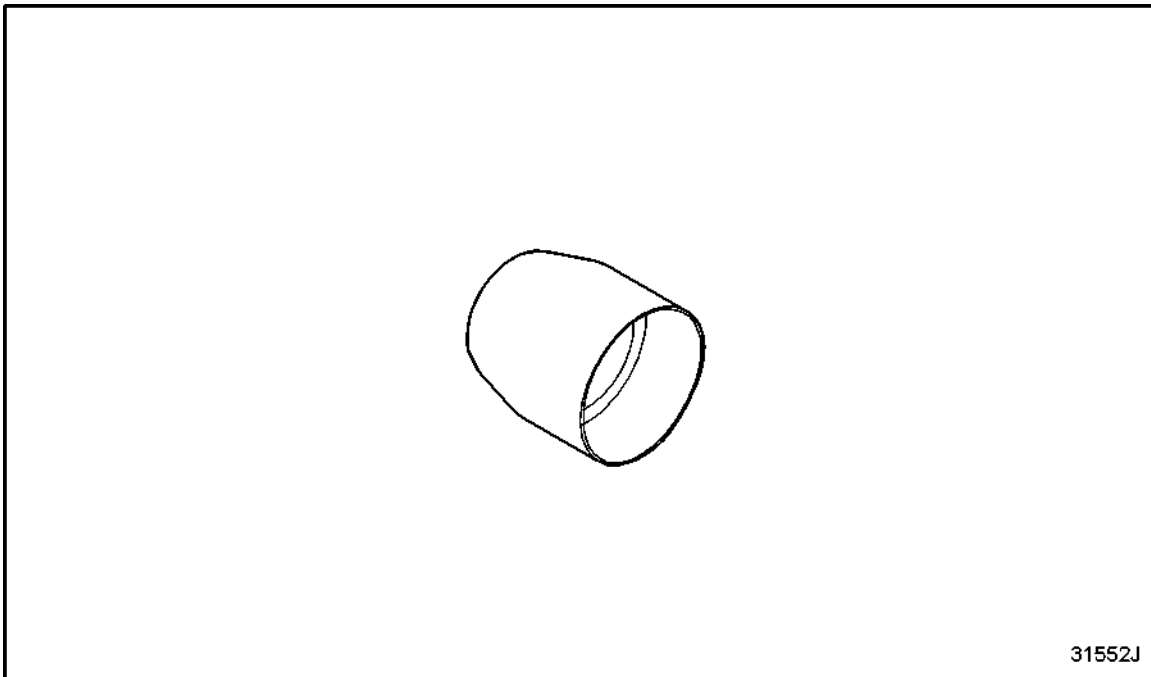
Injector Nut Seal Ring Installer,J 29197
